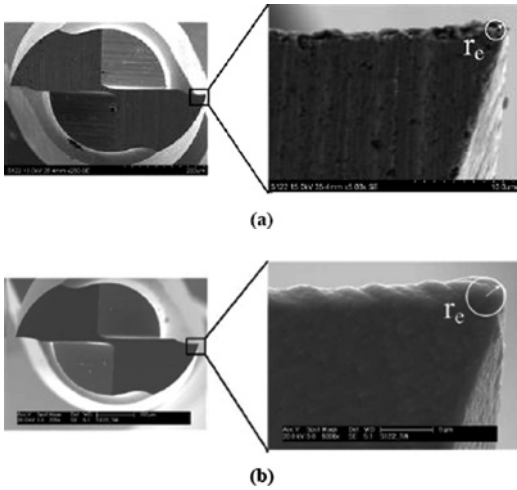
Condition of 500µm end mill micro grain carbide cutting tools (a) received from tool supplier and (b) after TiN coating and showing edge radius r_e
